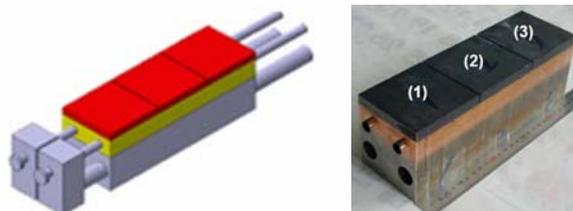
Blanket FW mock-up design and fabrication for prequalification tests.
